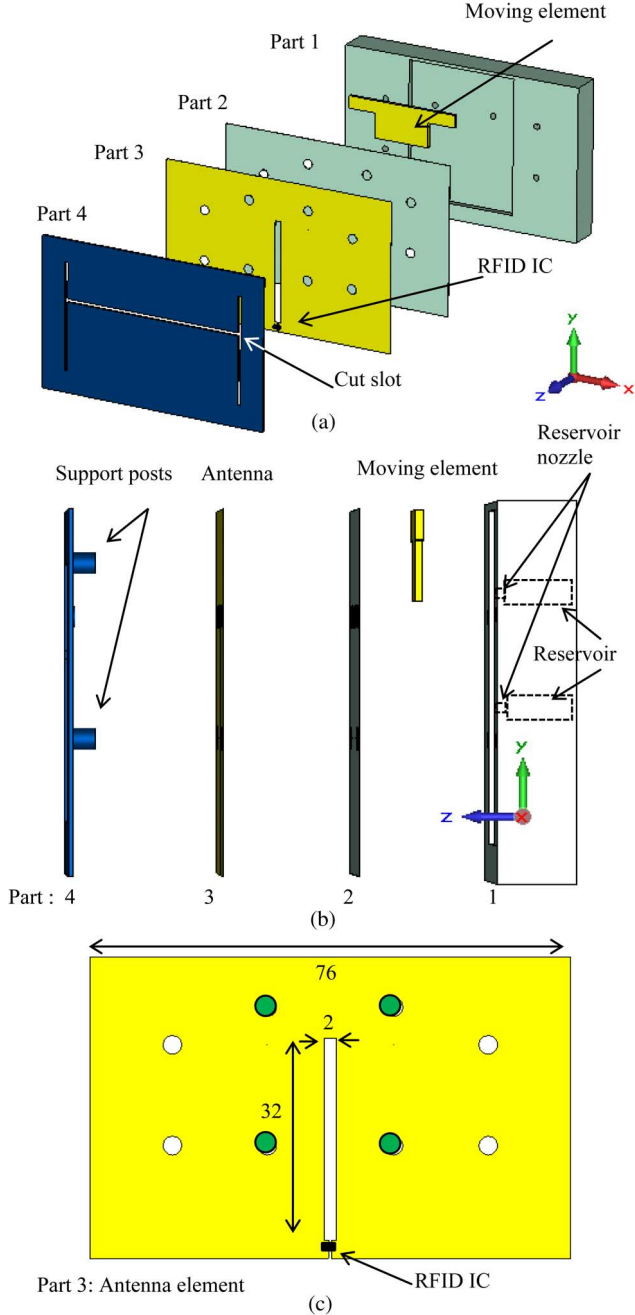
(a) Exploded view of tag sensor parts; (b) side view; and (c) antenna; ● support guide post. All dimensions in millimeters.
